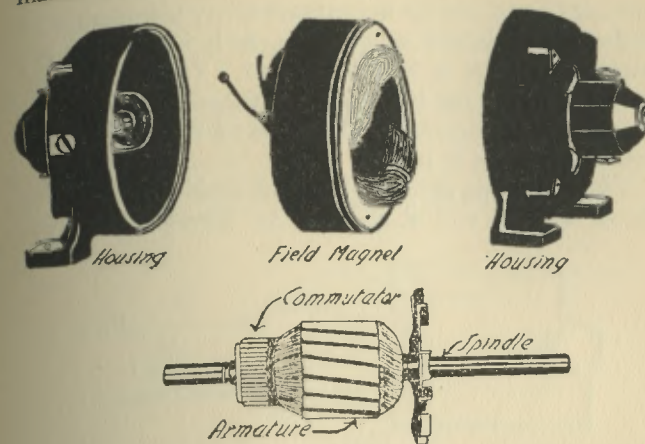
THE PARTS OF A DIRECT CURRENT MOTOR
